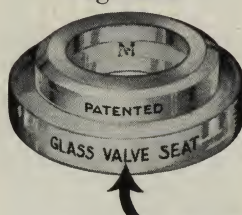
Shows Valve Assembly for Brass Lined Cylinders.
